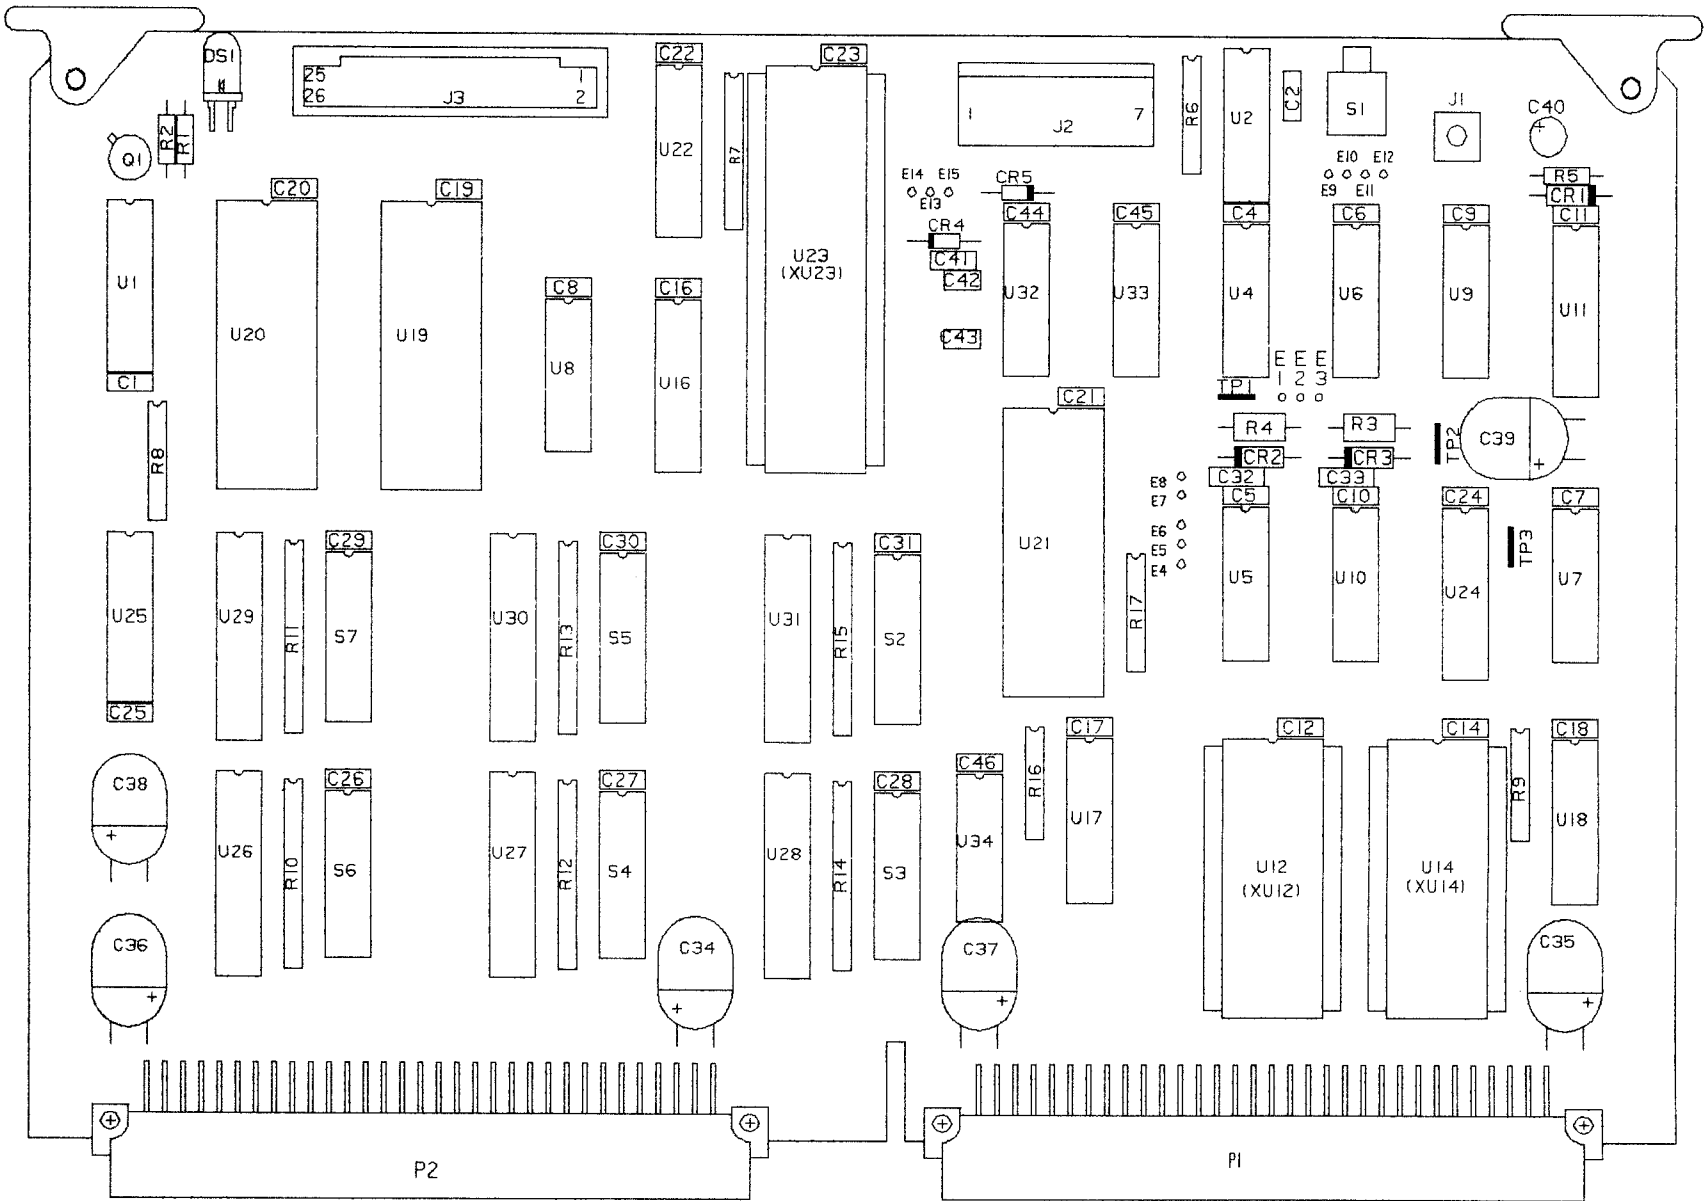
Digital I/O PWB Assembly A8 Component Locations (10133-2800, Rev. F)
